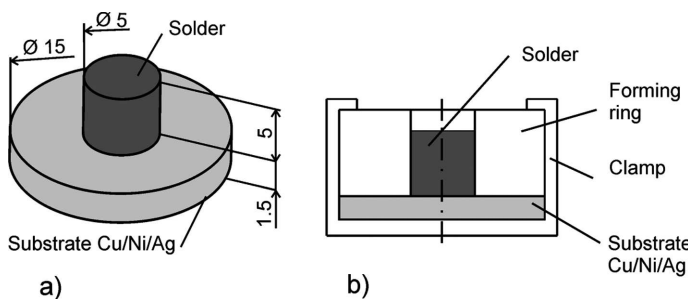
Test specimen a) shape and dimensions, b) preparation procedure
